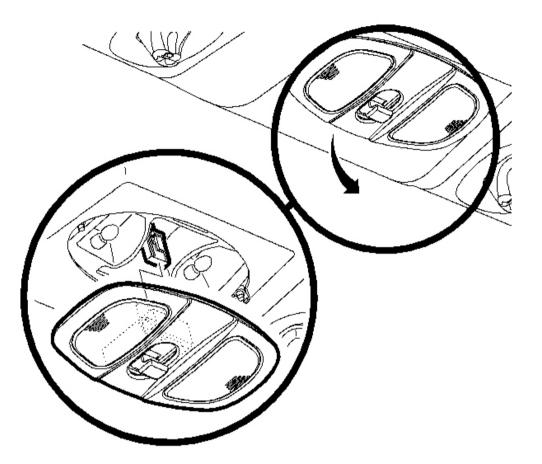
View Of Reading Lamp Cover Courtesy of GENERAL MOTORS CORP.
